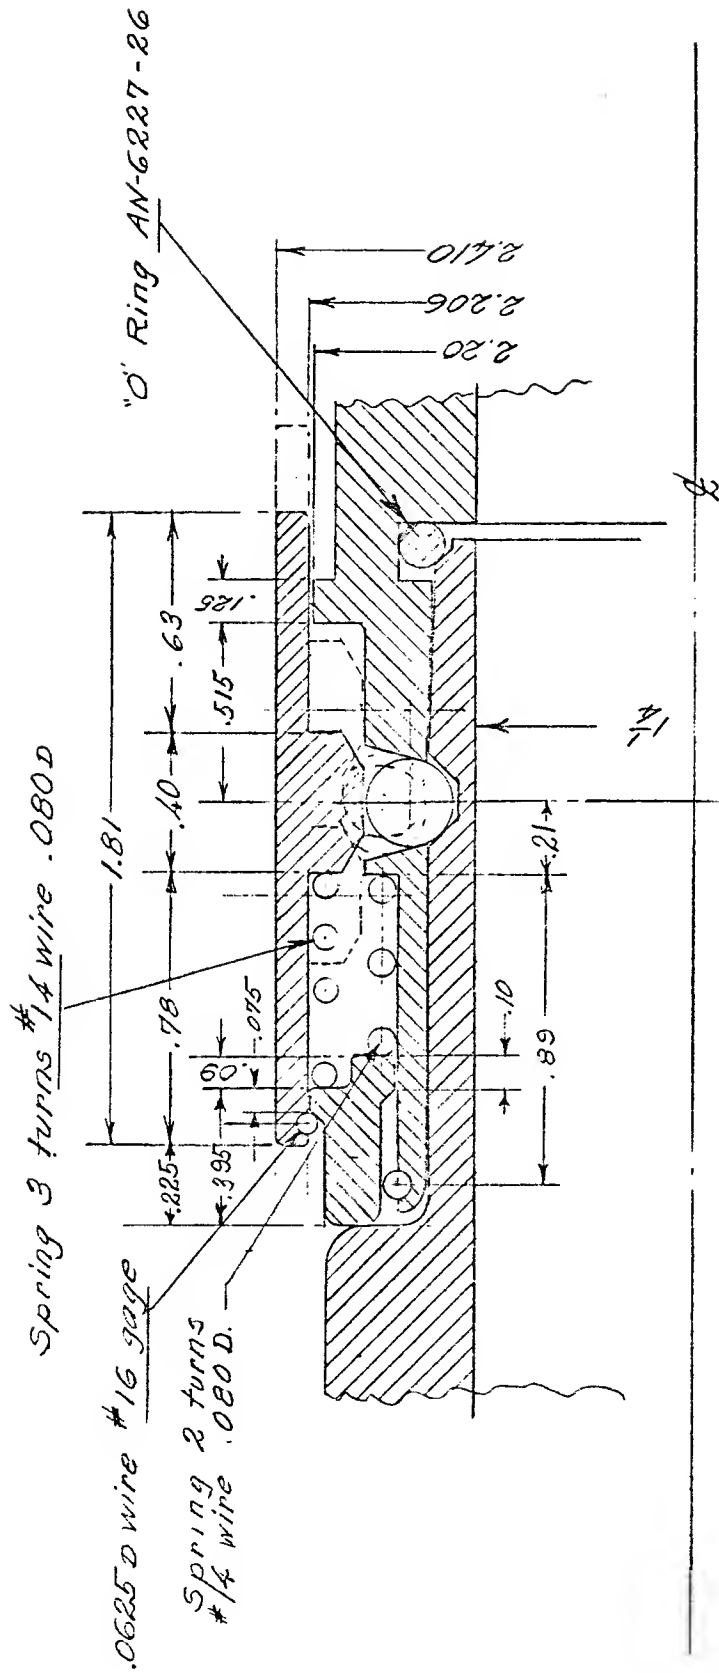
Assembly Drawing for Early Quick-Disconnect Coupling Design
